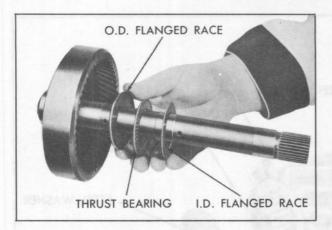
Installing Rear Internal Gear-to-Sun Gear Thrust Bearing and Races
